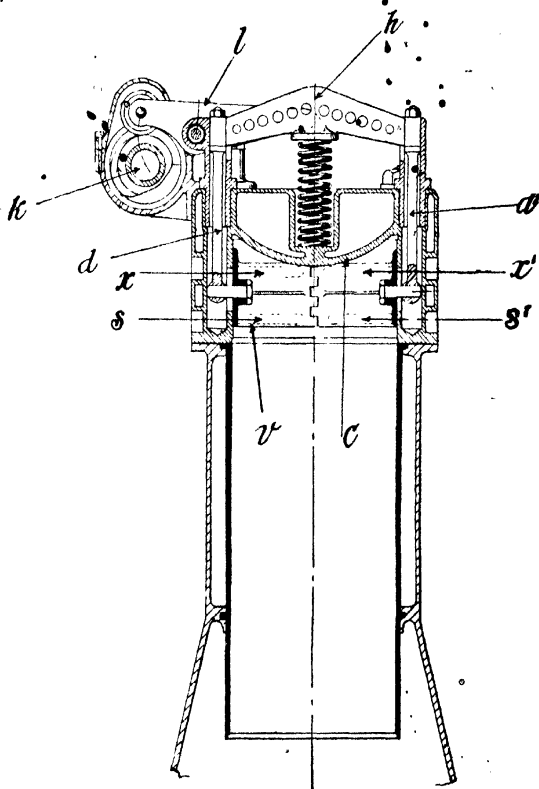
Cross-sectional elevation of 4-in. petrol motor, showing arrangement of cylinder head for the Howard sleeve valve.
